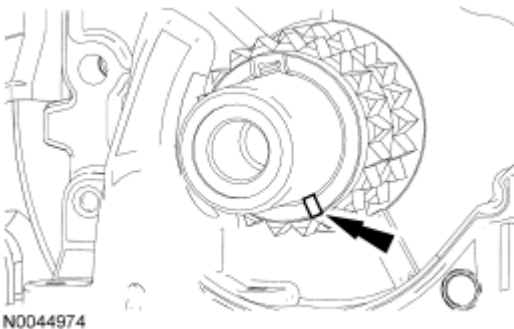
Locating Timing Marks On Crankshaft Sprockets
